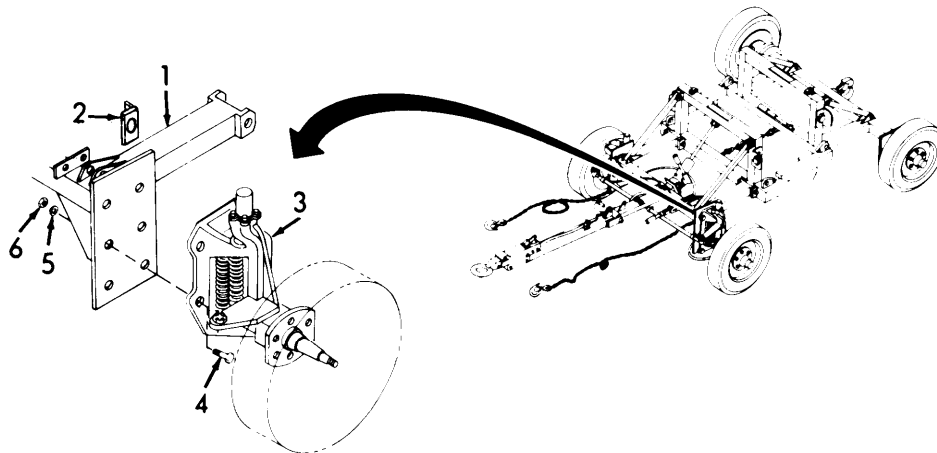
Shock Absorbing Spring Assembly, Removal.
